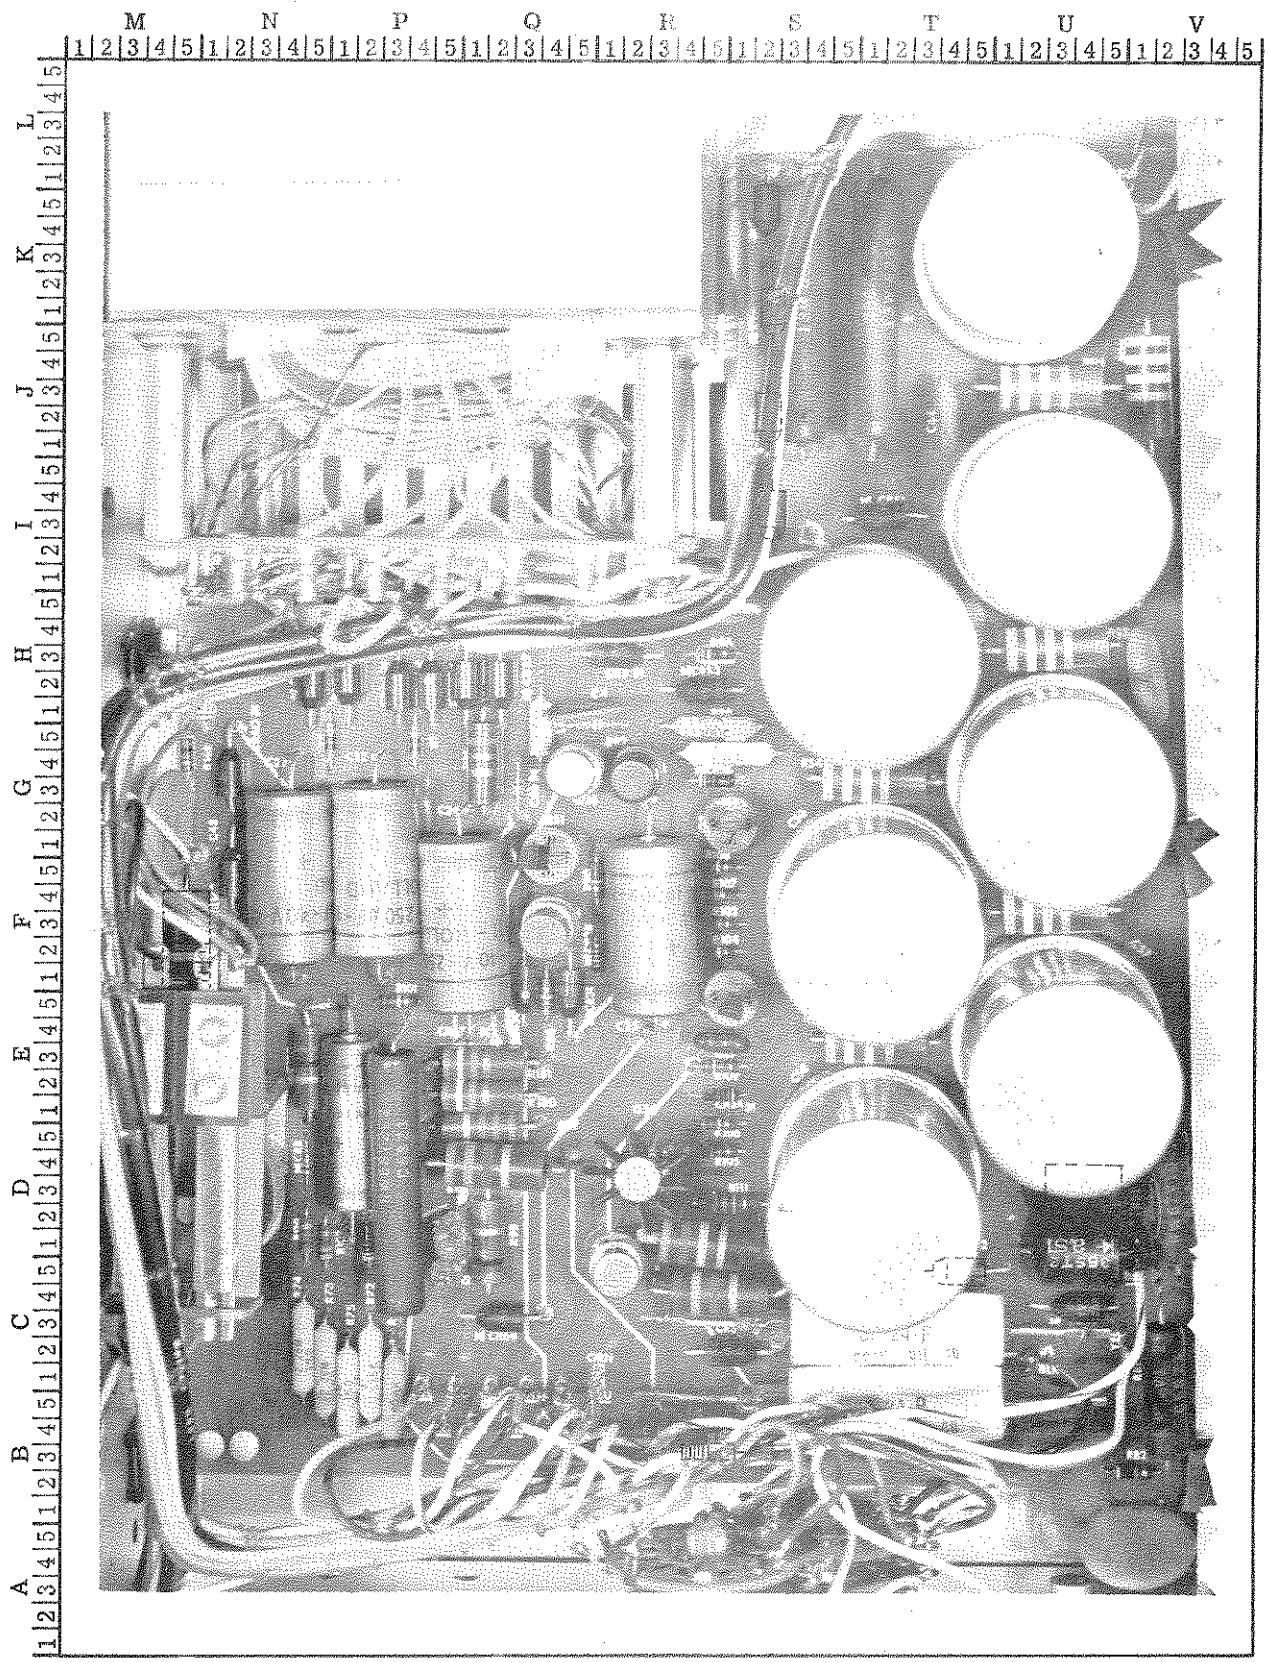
MAIN P/C ASSEMBLY (Left Hand Side)
